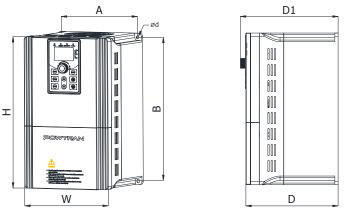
15~22kW G3 outline dimension (Frame No.: A3)
